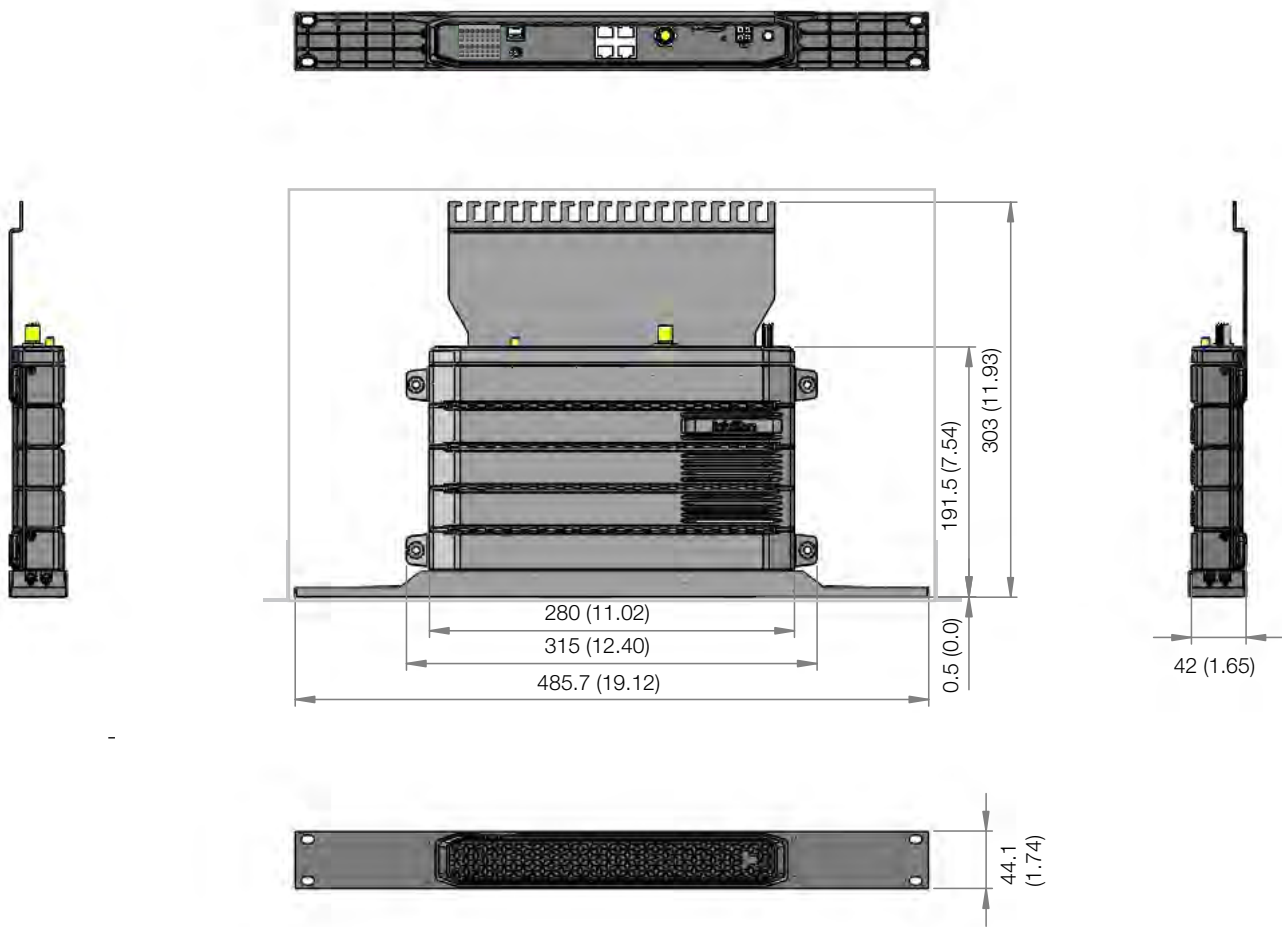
BDU dimensions (installed using 19-inch BDU Rack Mount Kit)
